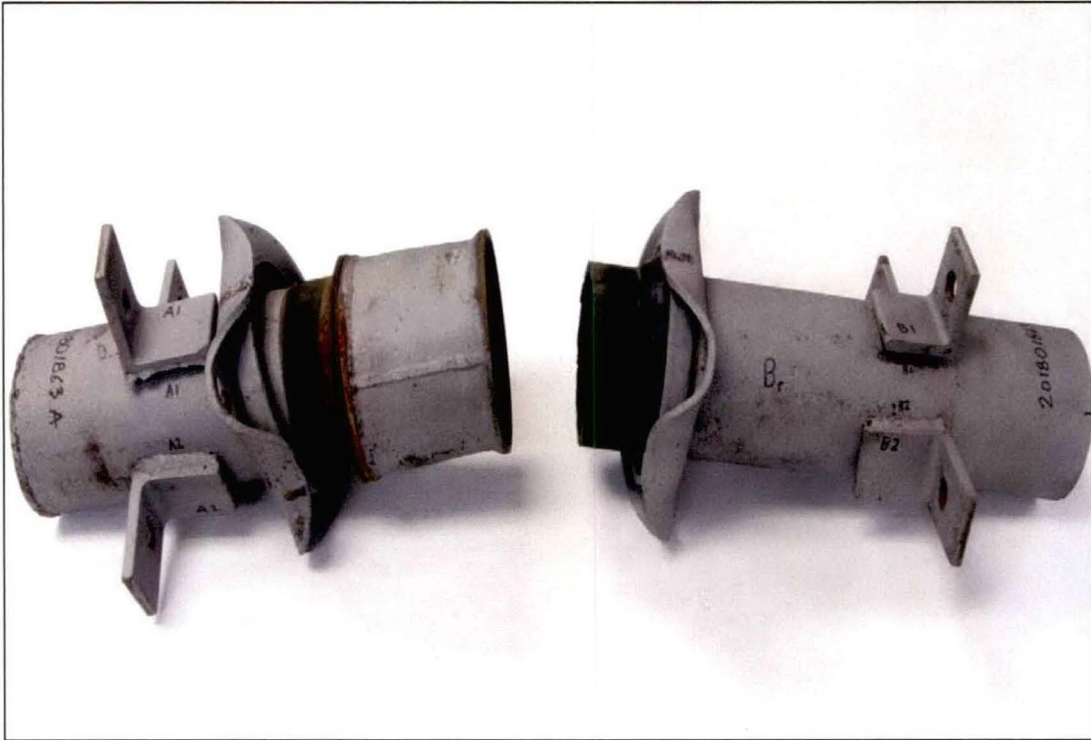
Photograph of the A (left) and B (right) sides of the coupled pipe after disassembly.
